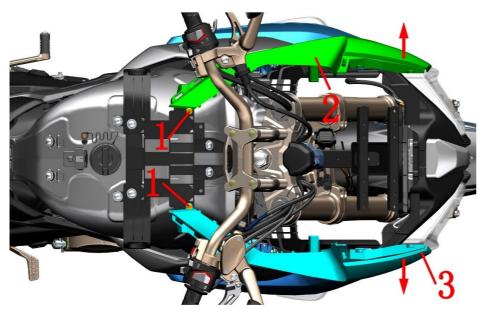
FRONT FORK COMPONENT		Left and right hood assembly	CHK	40)
